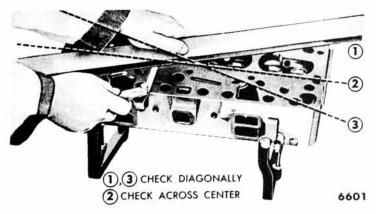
Checking Flatness of the Cylinder Head Gasket Surface—Typical
